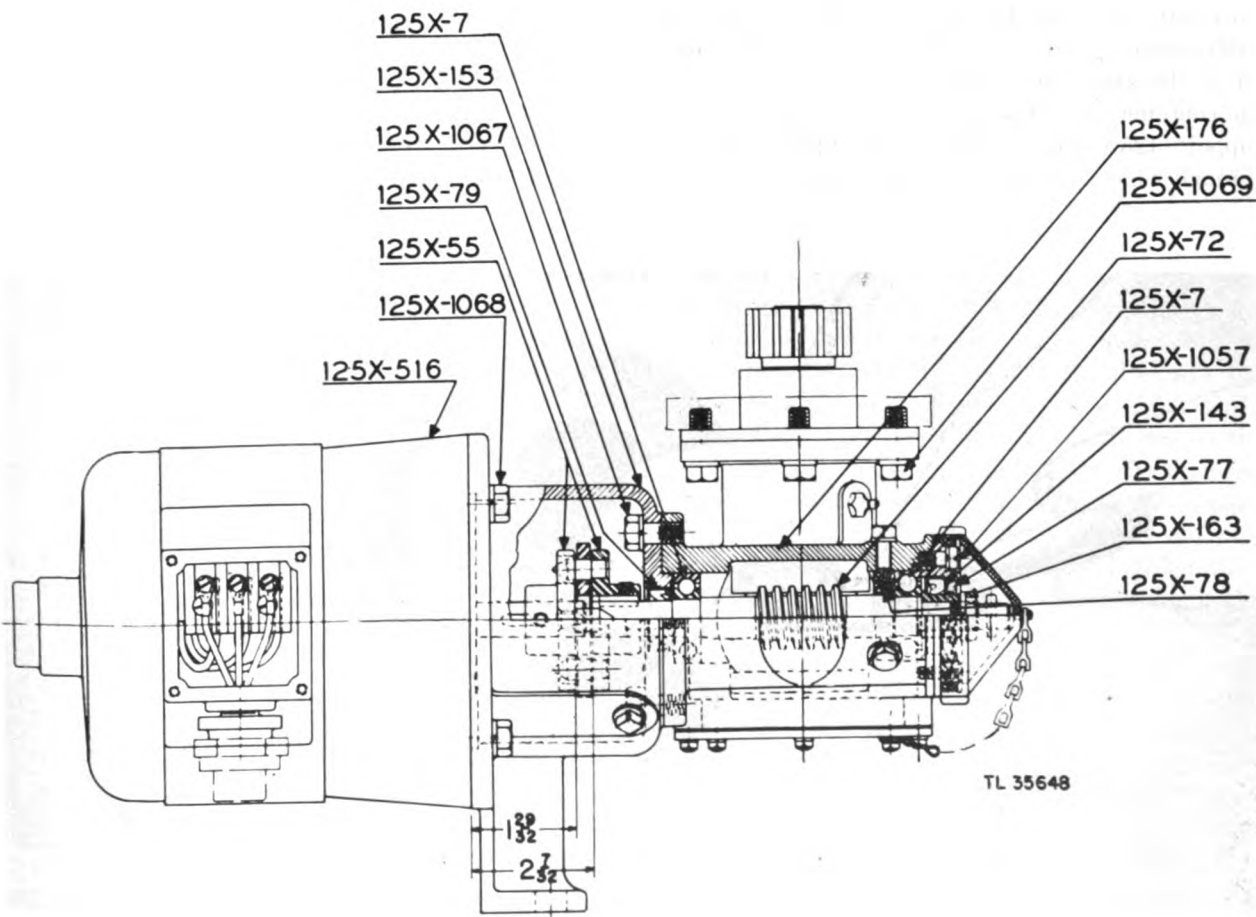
Tower TR-24-A, motor and worm-gear unit.
